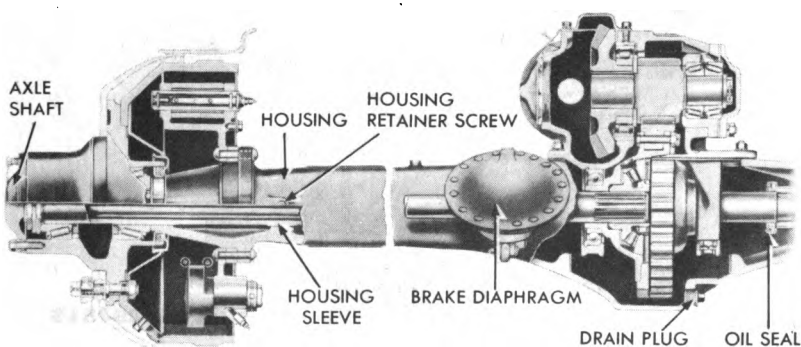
Gear Arrangement in Double Reduction Rear Axle.
